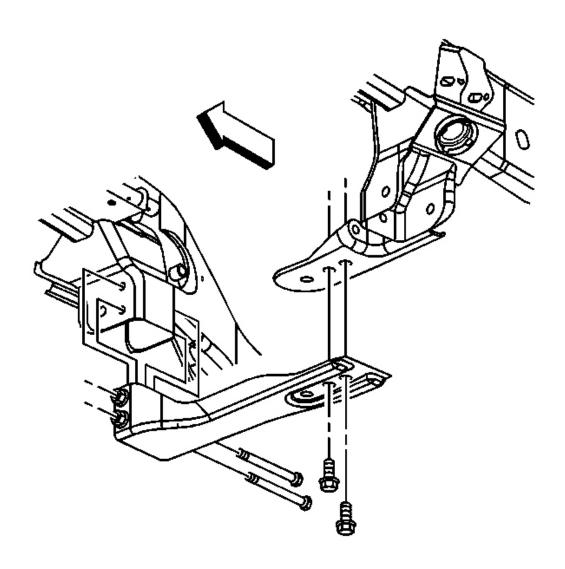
View Of Crossmember Bolts & Bar (4WD) Courtesy of GENERAL MOTORS CORP.
